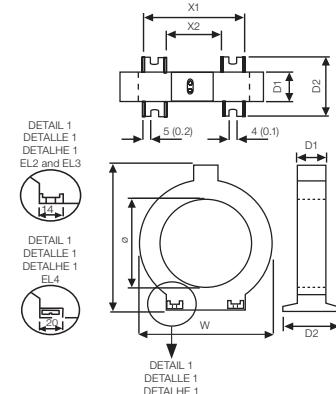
Dimensions mm (in) of the EL2, EL3 and EL4 Earth Leakage Sensors
